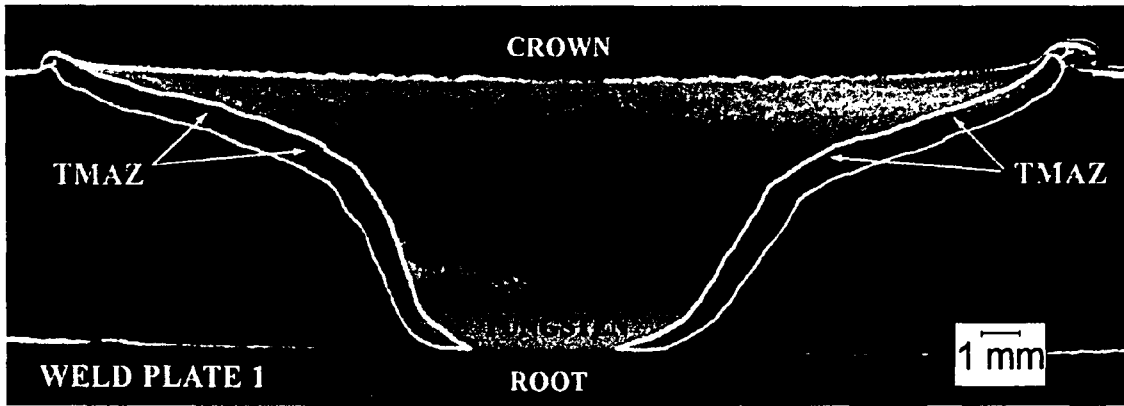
Representative image of a single-sided FS weld on AL-6XN plate.
